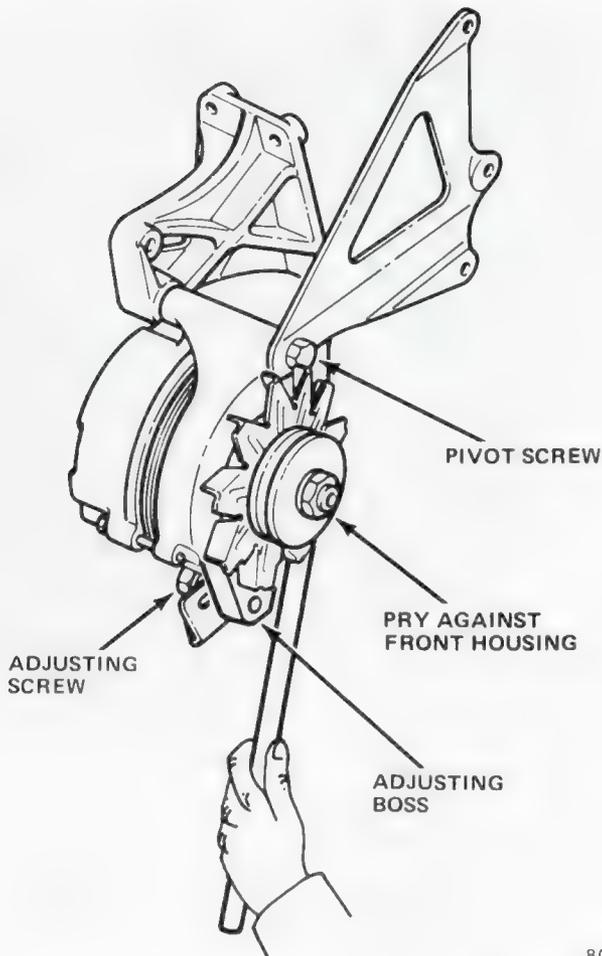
C-13 Alternator Adjustment—Four-Cylinder
